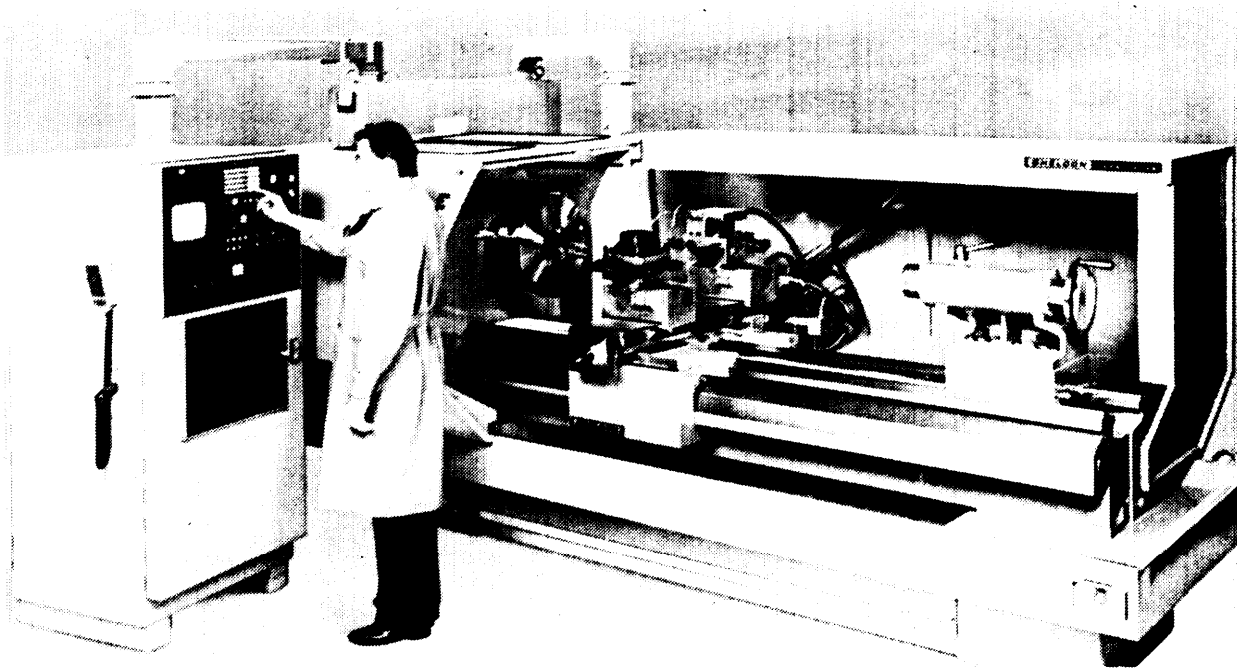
Two-axis, Universal lathe. (Sheldon Machine Company)
